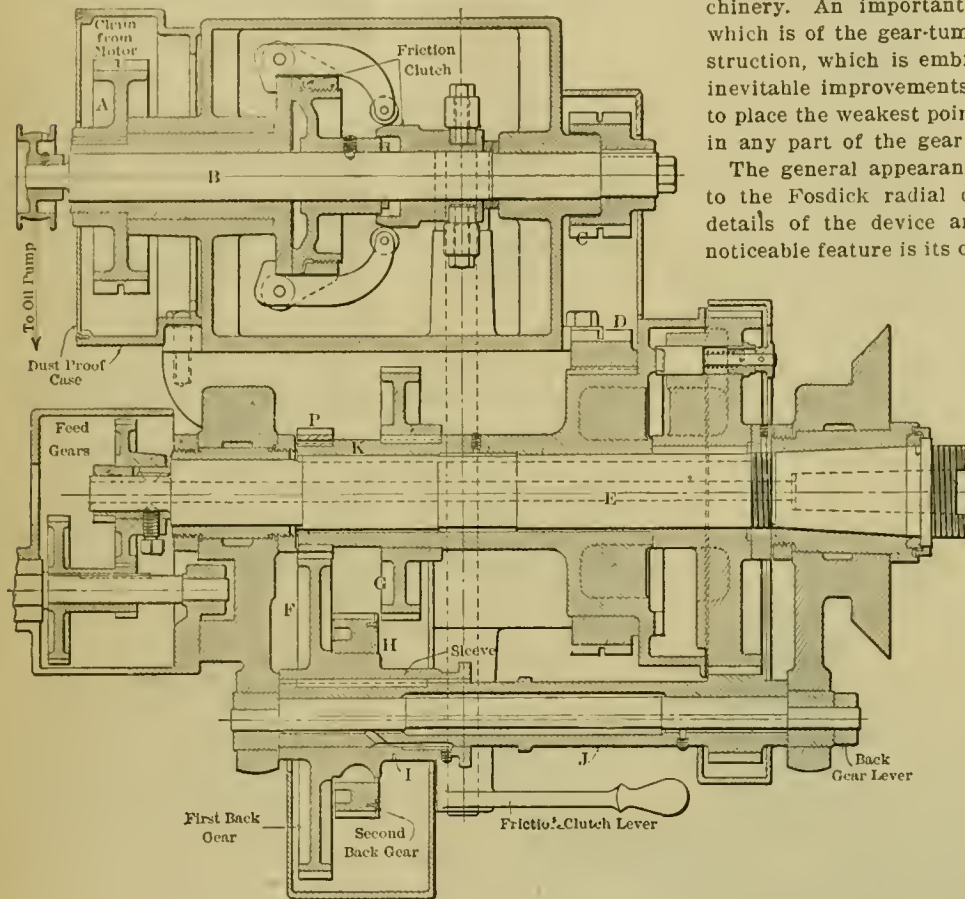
HORIZONTAL SECTION THROUGH SPINDLE OF THE NEW MOTOR-DRIVEN CINCINNATI MILLER, SHOWING DETAILS OF CLUTCH, DOUBLE BACK-GEARS, ETC.
